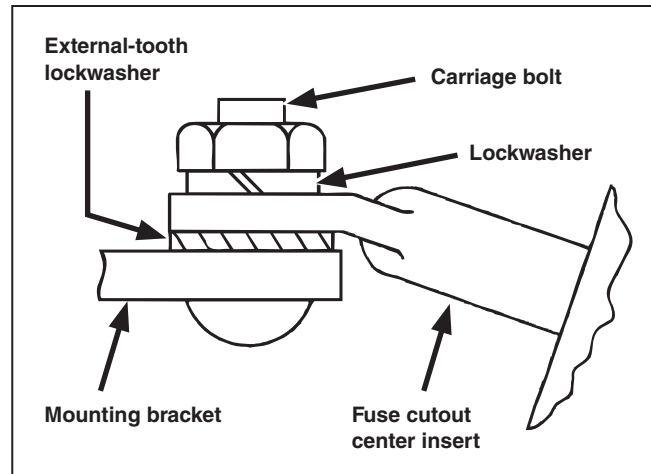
Detail of the fuse cutout attachment to the mounting bracket.
